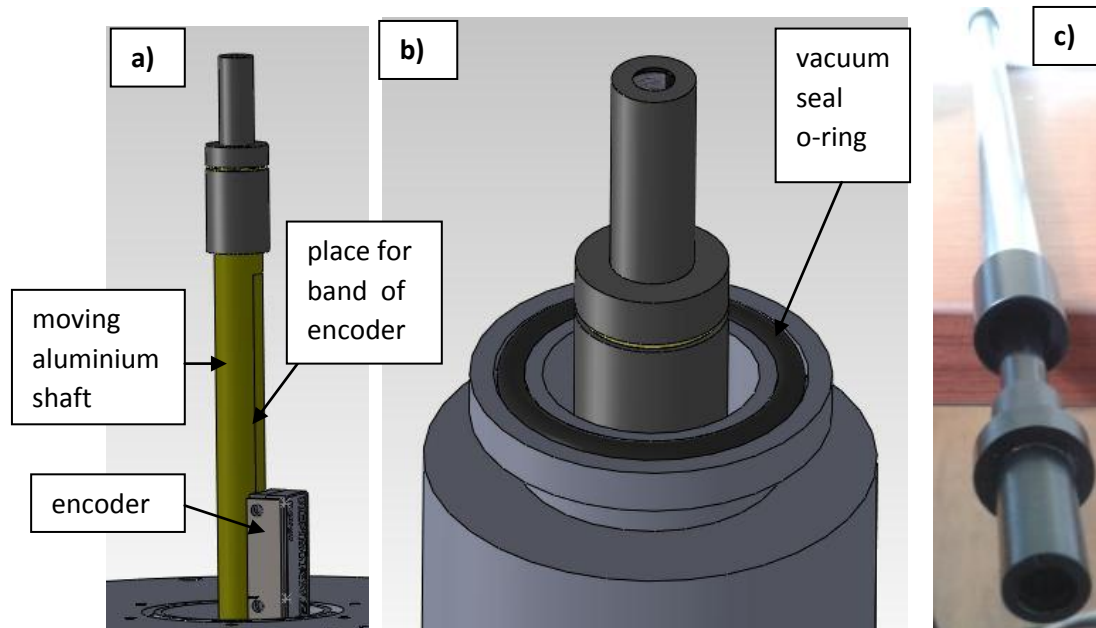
a) encoder and place of the band on the shaft. b) Entrance of the sample rod and enclosing the section of vacuum with sealing o-ring. c) Sample rod is being fixed to motion provider aluminium rod through two magnets. Vacuum seal o-ring (in the middle) was used as a vacuum cap in Figure 6.14.
